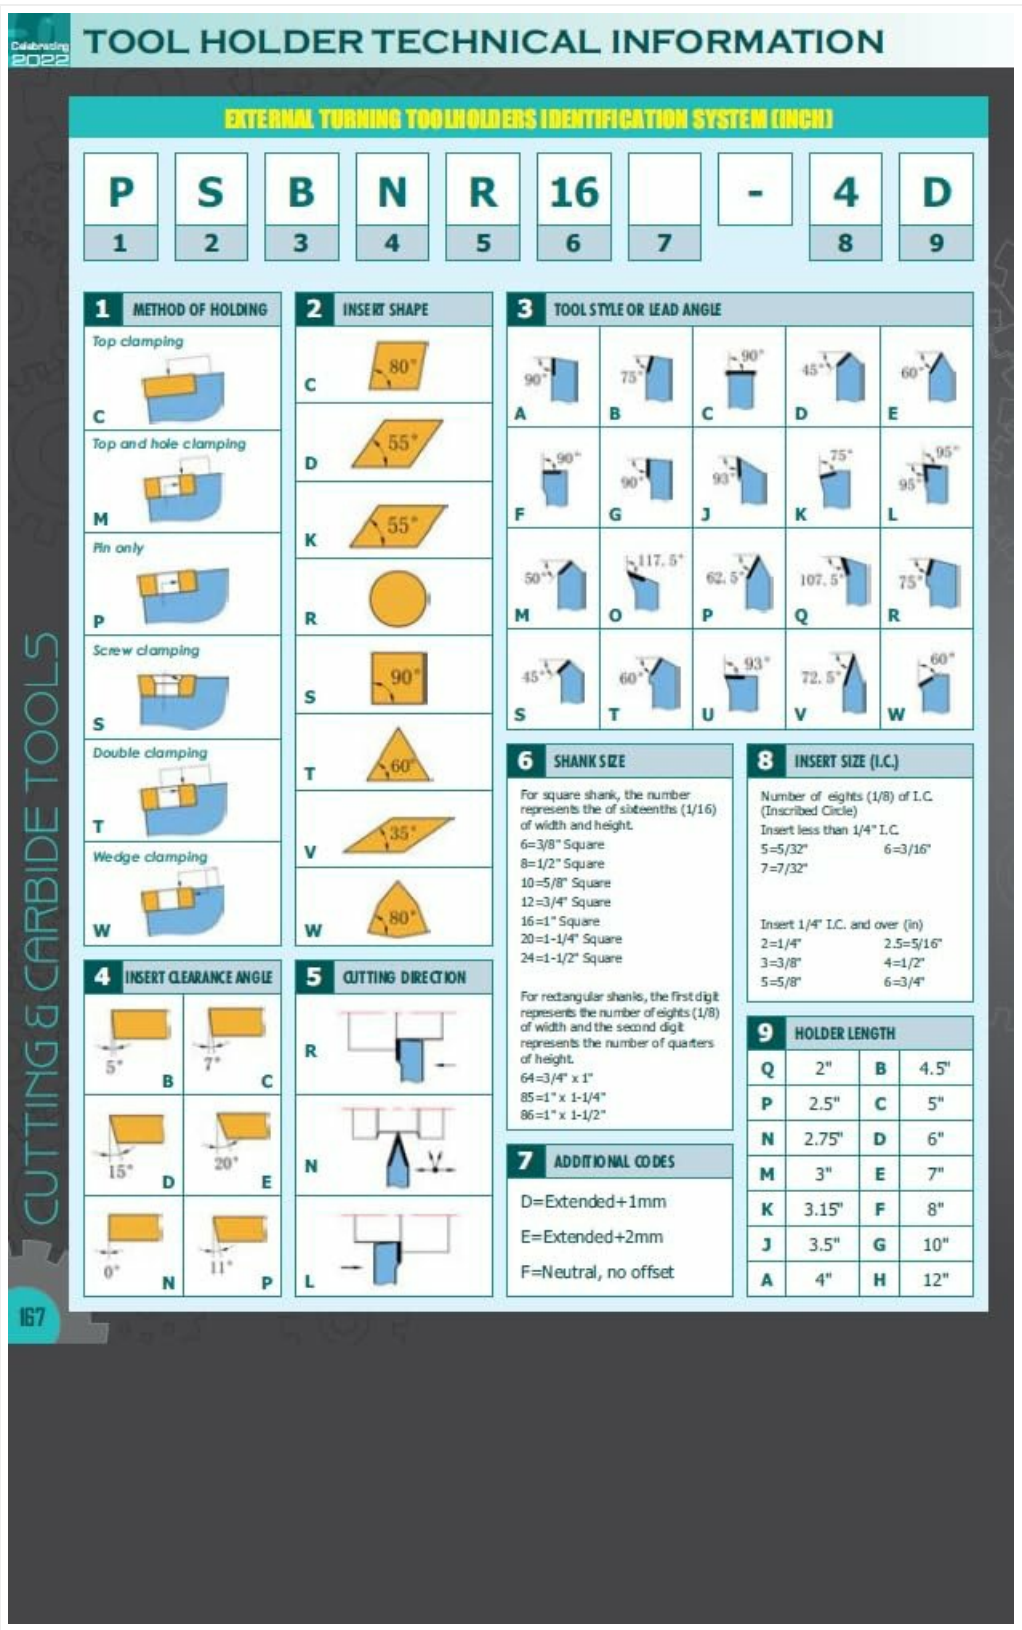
Technical information for external turning toolholders, illustrating various clamping methods, insert shapes, and designation systems. This helps in selecting the correct tool holder for the CPMT insert.
